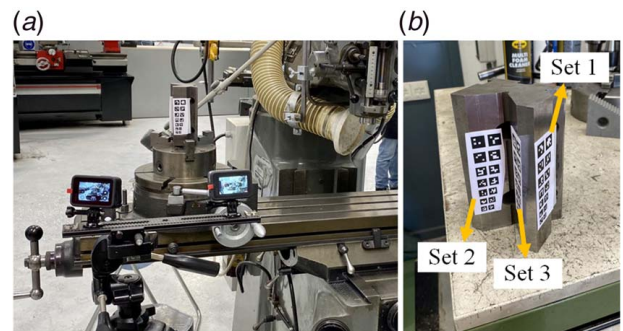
Setup of the experiment: (a) the setup and (b) three sets of markers that are glued to the workpiece
